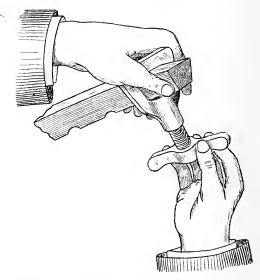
Use a belt punch of the right size and keep it central when drilling the hole.
